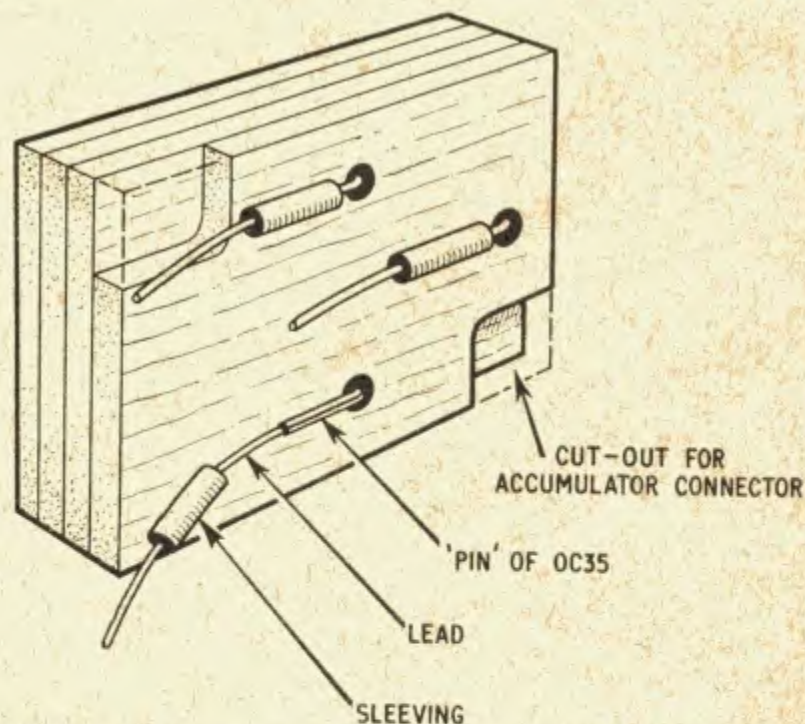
Transistor mounting chamber showing the wires from the transistor
